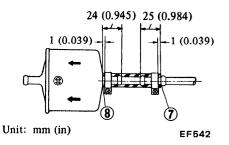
Fuel feed pipe to fuel filter inlet pipe rubber hose
